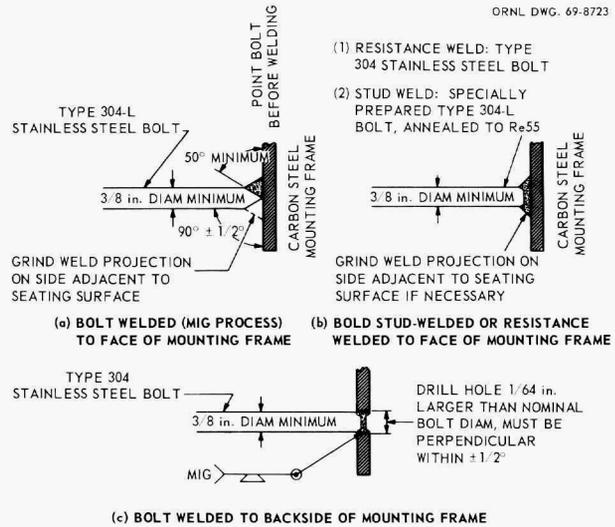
Approved methods of welding clamping bolts to filter mounting frames.
